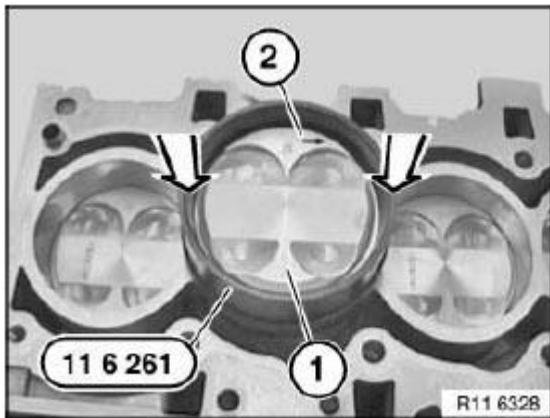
Pressing In Piston With Special Tool (11 6 261)
